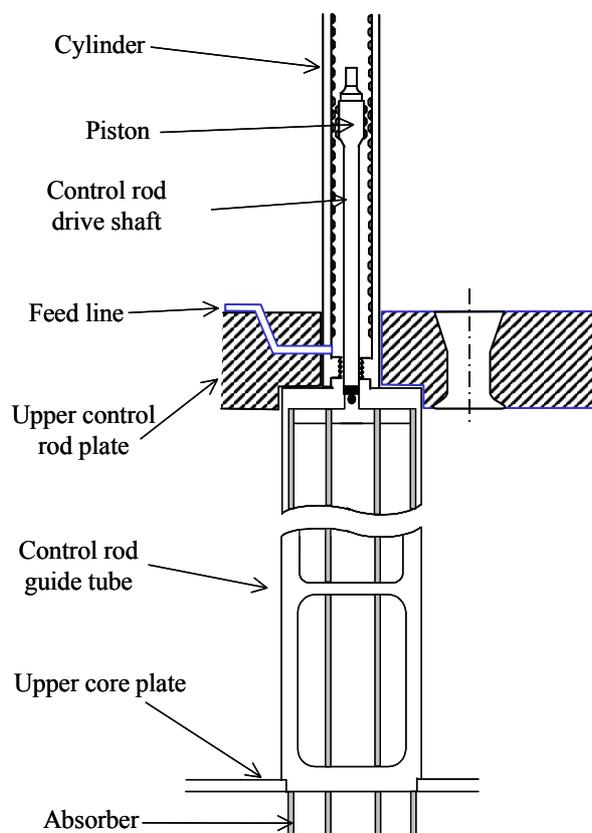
Hydraulic drive adjustment to the SCOR design.
